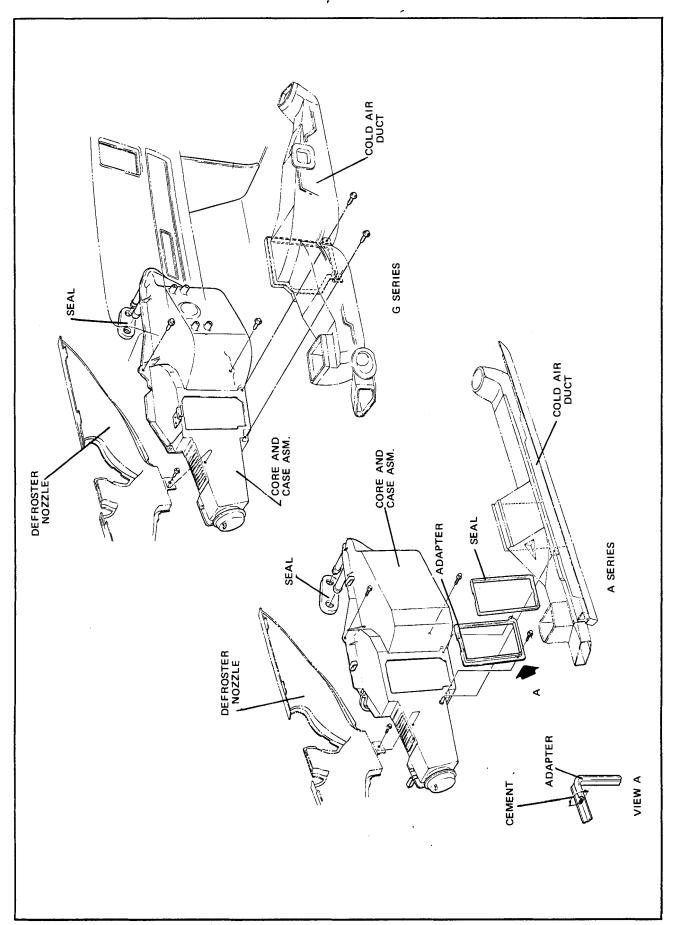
A-120 A/C Heater Core and Case - A and G Series
